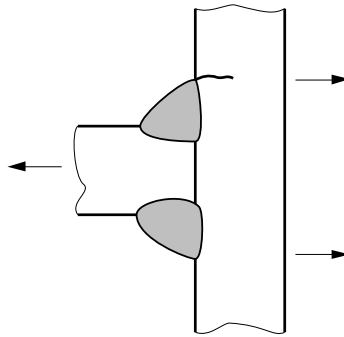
Fatigue cracking of a T-shaped weld when the transverse element undergoes a bending stress
